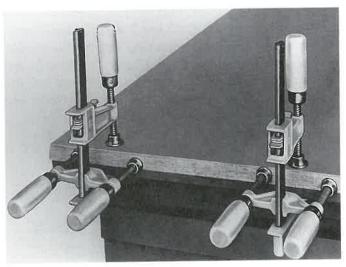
Use edge clamp fixtures to apply bonding pressure around the edge of tabletops. (*Franklin International*)
